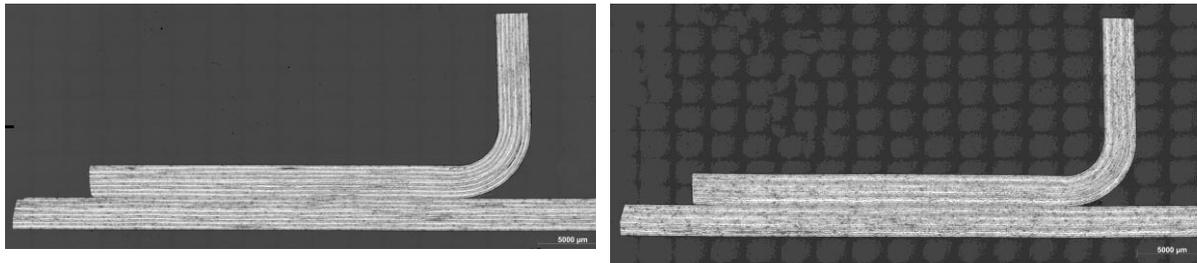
Cross-sections of welded samples (SW set 3 cross-ply left, SW set 4 QI right)
